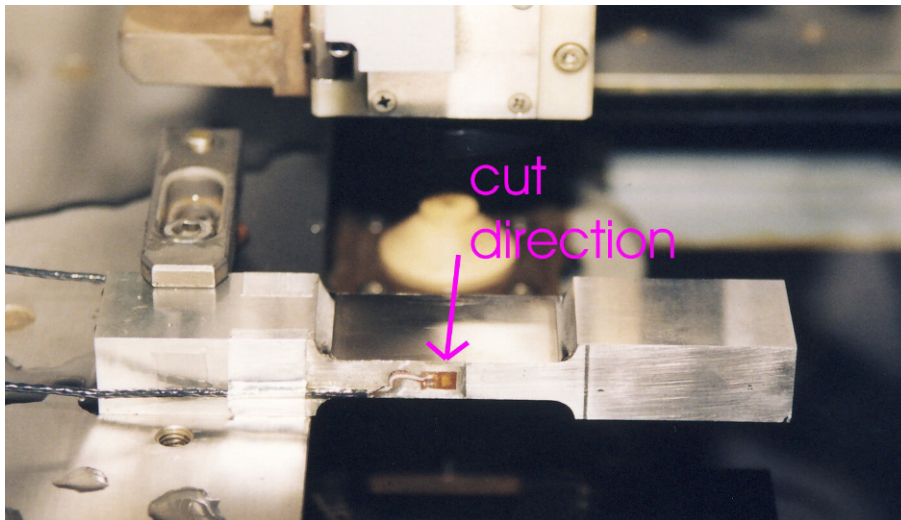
Beam A just prior to EDM cutting for the slitting method. The central section of the beam is 30 mm thick and 10 mm wide.
